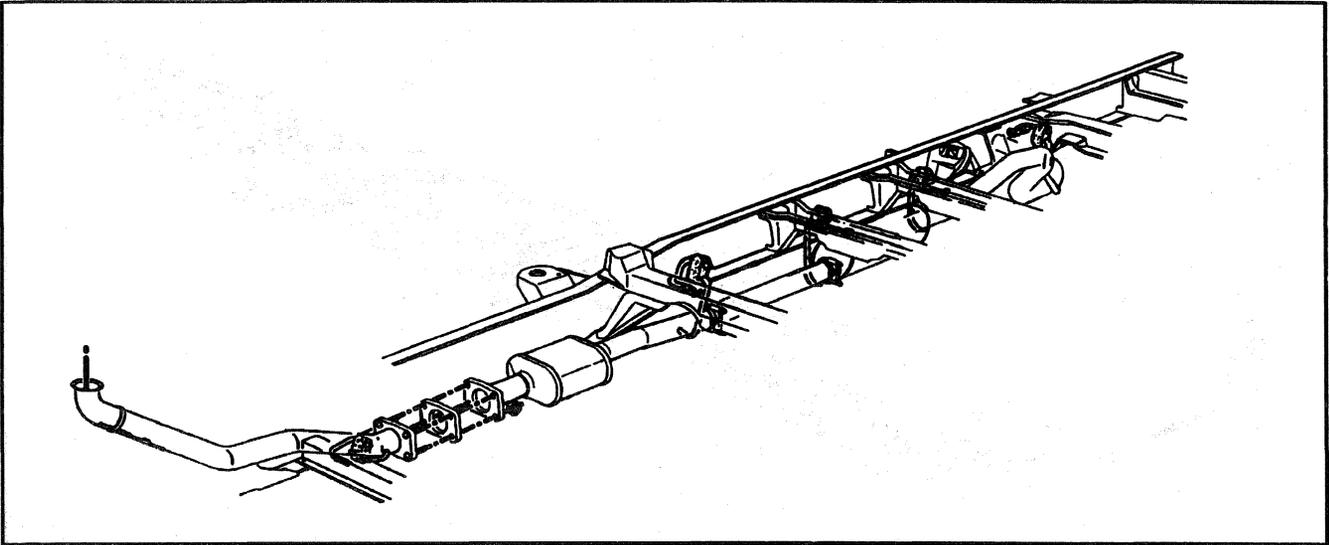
Exhaust System - C 314 Cab Chassis w/6.5L Diesel Engine over 15,000 GVW
